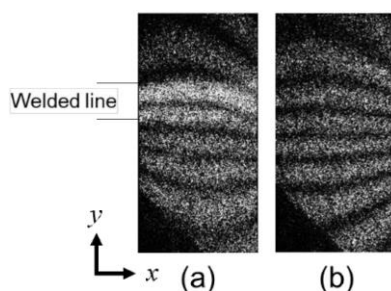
Typical fringe pattern of spot heated specimen. (a) welded, (b) non-welded
